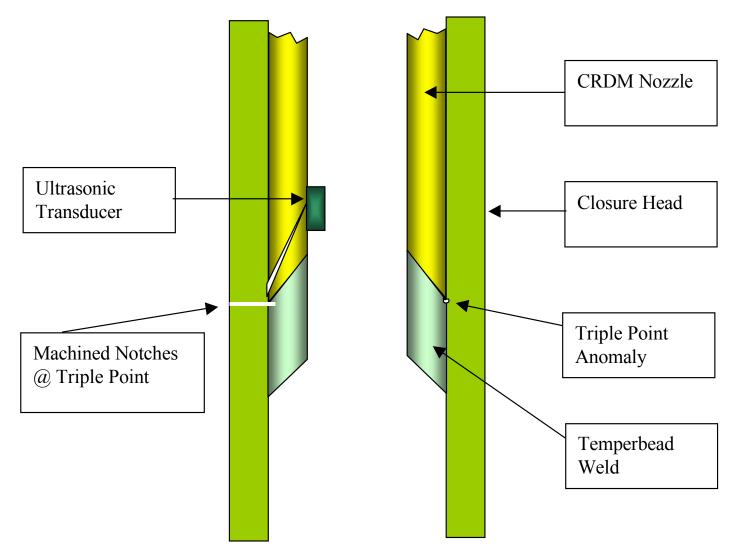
Typical IDTB Weld Configuration with Weld Solidification Anomaly
